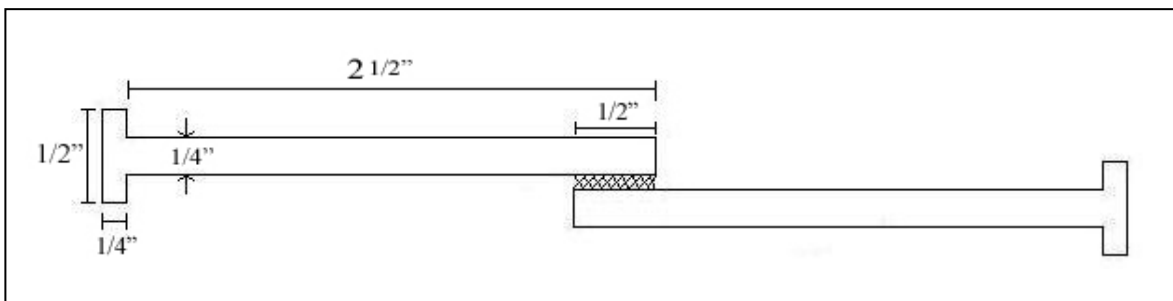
Overall design and dimensions for the shear test specimen (in inches), Side View. The thickness of the porous section is 3 mm.
